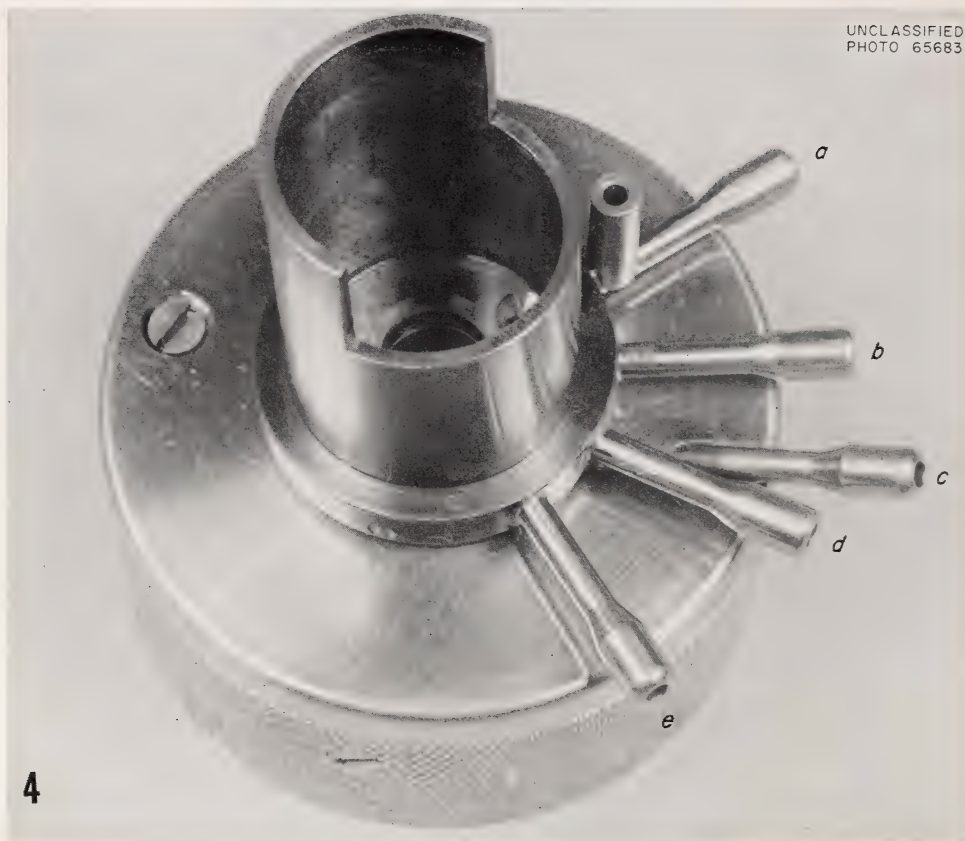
Top damper bearing assembly for B-IV zonal centrifuge. (a) Overflow oil from bearing; (b) cooling water out; (c and d) oil lines into ball joint and bearing; and (e) cooling water in.
